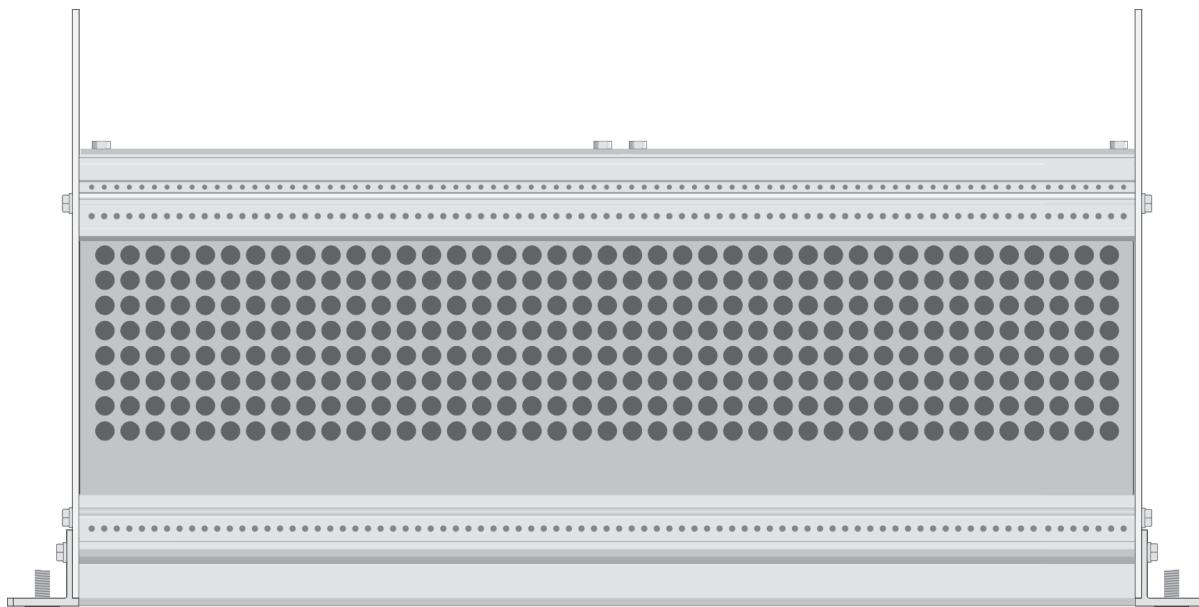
Top view of the board rack, type BGT04, with label bar
